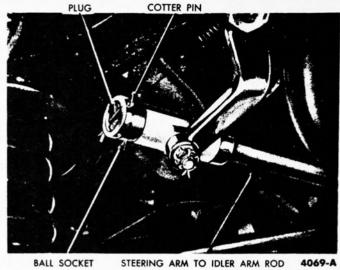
Steering Arm To Idler Arm Rod Ball Socket
